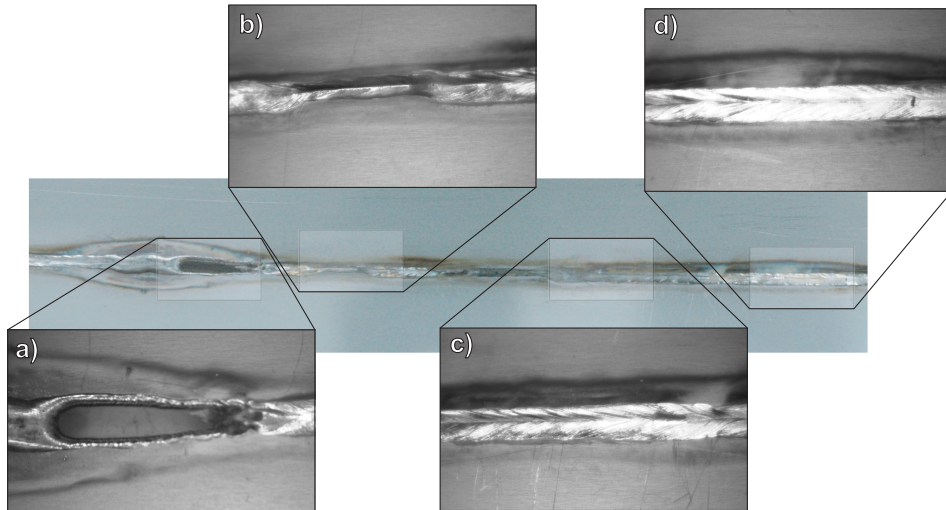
Photograph of the welded seam with weld imperfections. The weld was performed with a laser power of 1000 W, a welding speed of 15 mm/s and 0 mm offset of the laser focal point. a) Some weld excess and a hole. b) Evidence of misalignment resulting a thinner and badly formed weld. c) Slight convexity and the weld appearance reveals a small misalignment. d) Misalignment traces.
